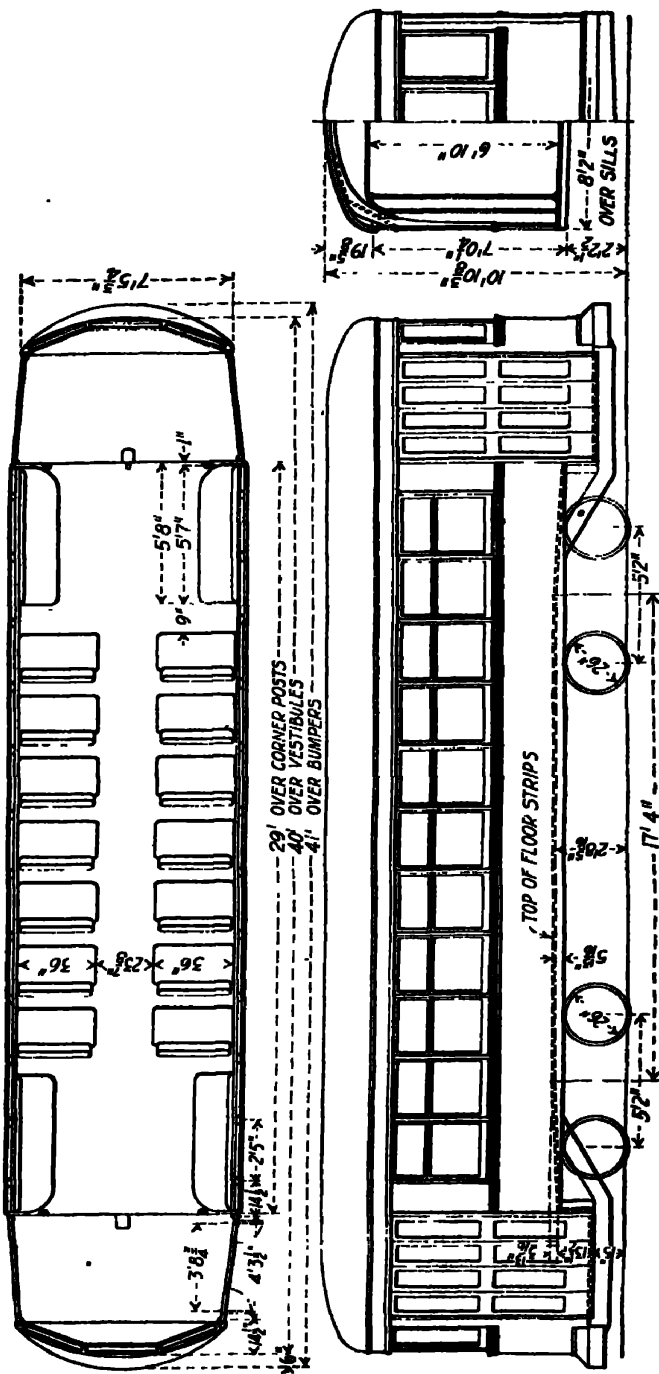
Plan, Elevation and End Section of Double-Truck City Car
